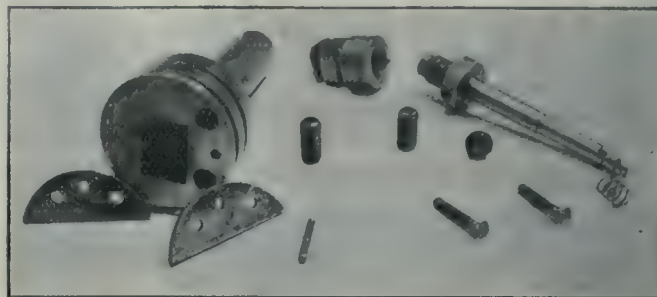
PARTS OF ECCENTRIC BORING BAR HOLDER.
